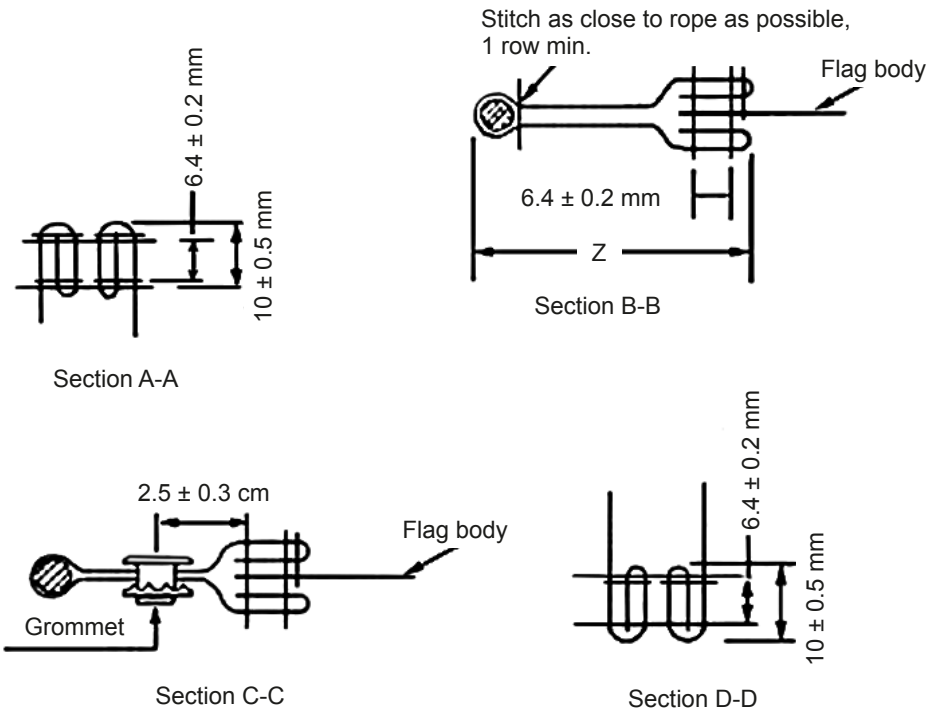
Construction details — Subtypes 3B and 4B flags – Separate header
